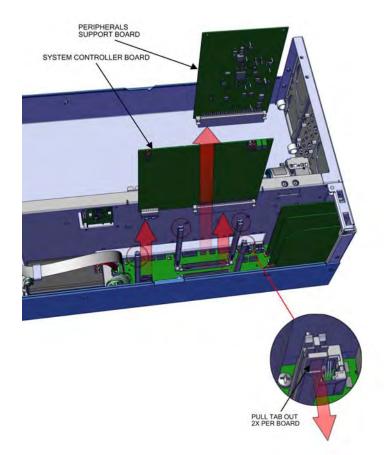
Replacing the Peripherals Support or System Controller Board
